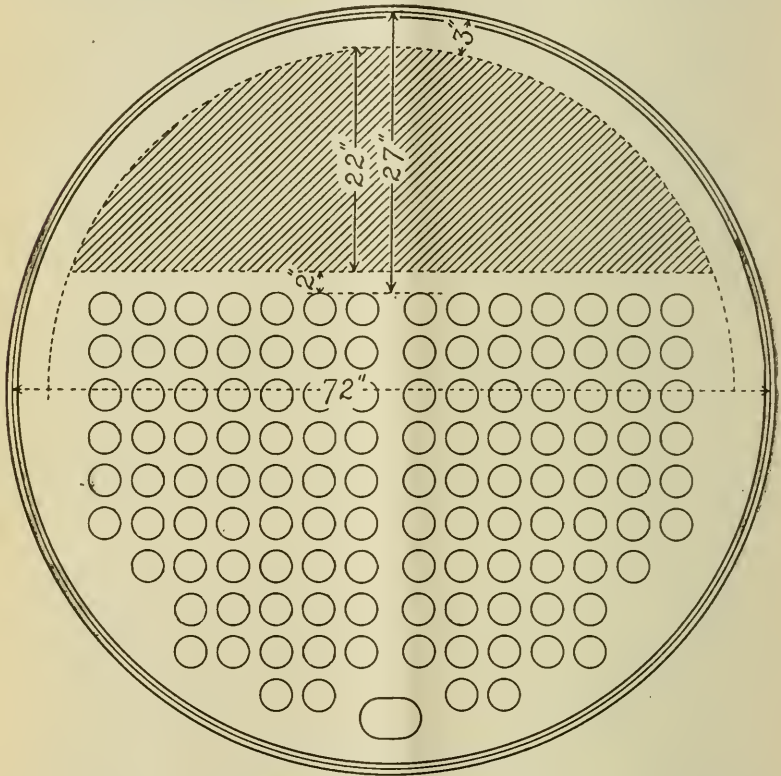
SHOWING THE SEGMENT THAT REQUIRES BRACING, ON A BOILER HEAD.
